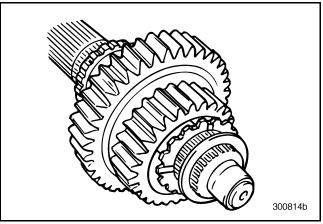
Installing Internal- and External-Toothed Thrust Washers
